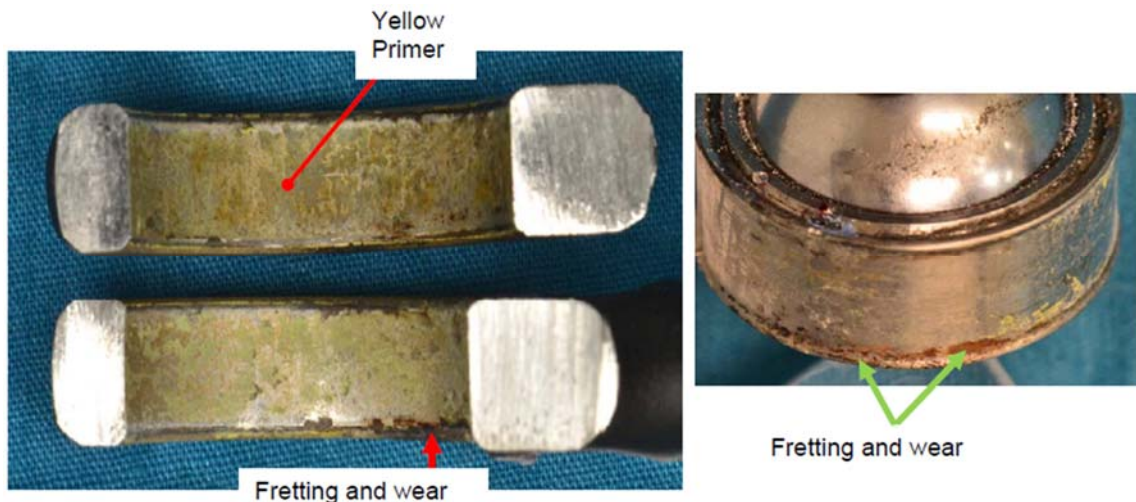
Fretting and wear observed on the chamfer and spherical bearing outer ring of the crosshead-side of PCL S/N TE-0168. (photo courtesy of Bell Helicopter)
